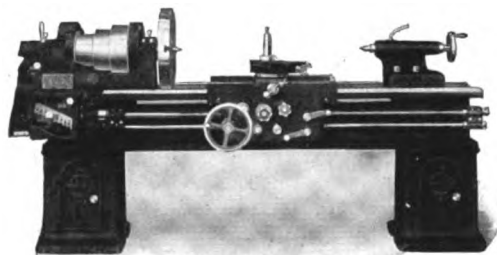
Monarch 18-Inch Quick Change Gear Lathe
